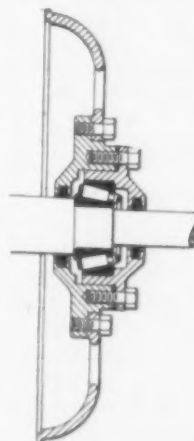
Tapered Roller Bearing Completely Inclosed in a Cartridge
